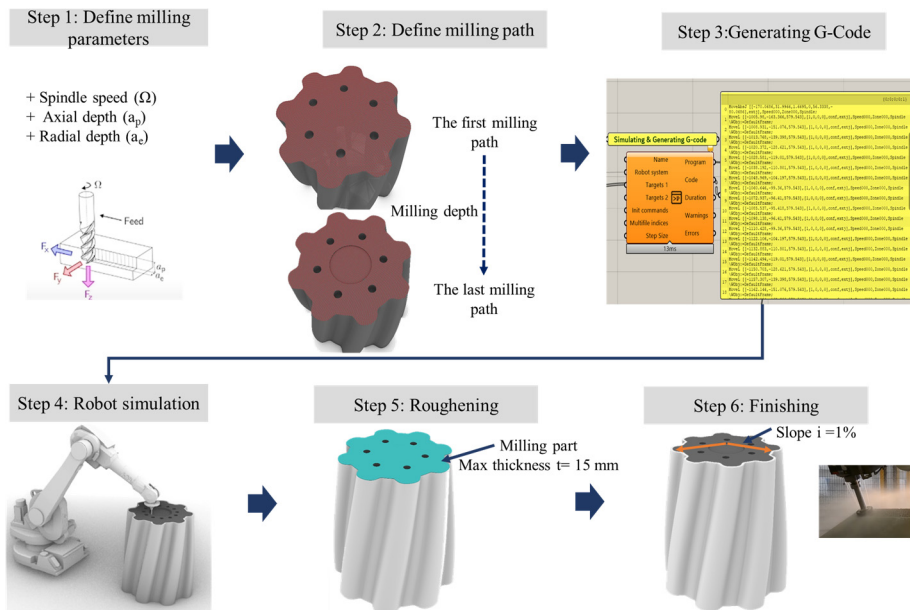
Robot milling of the top surface of a prefabricated column segment
